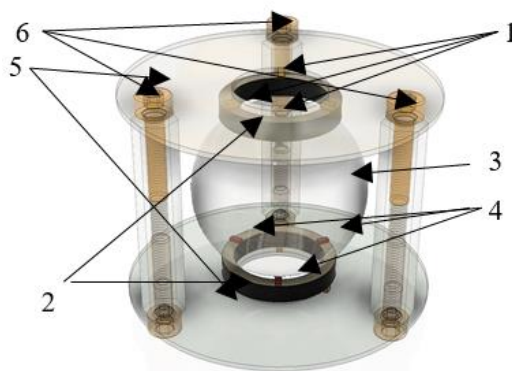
Structure of the ultrasonic motor: 1 – elastic supports; 2 – piezoelectric actuators; 3 – rotor; 4 – contact elements; 5 – flanges; 6 – screws
